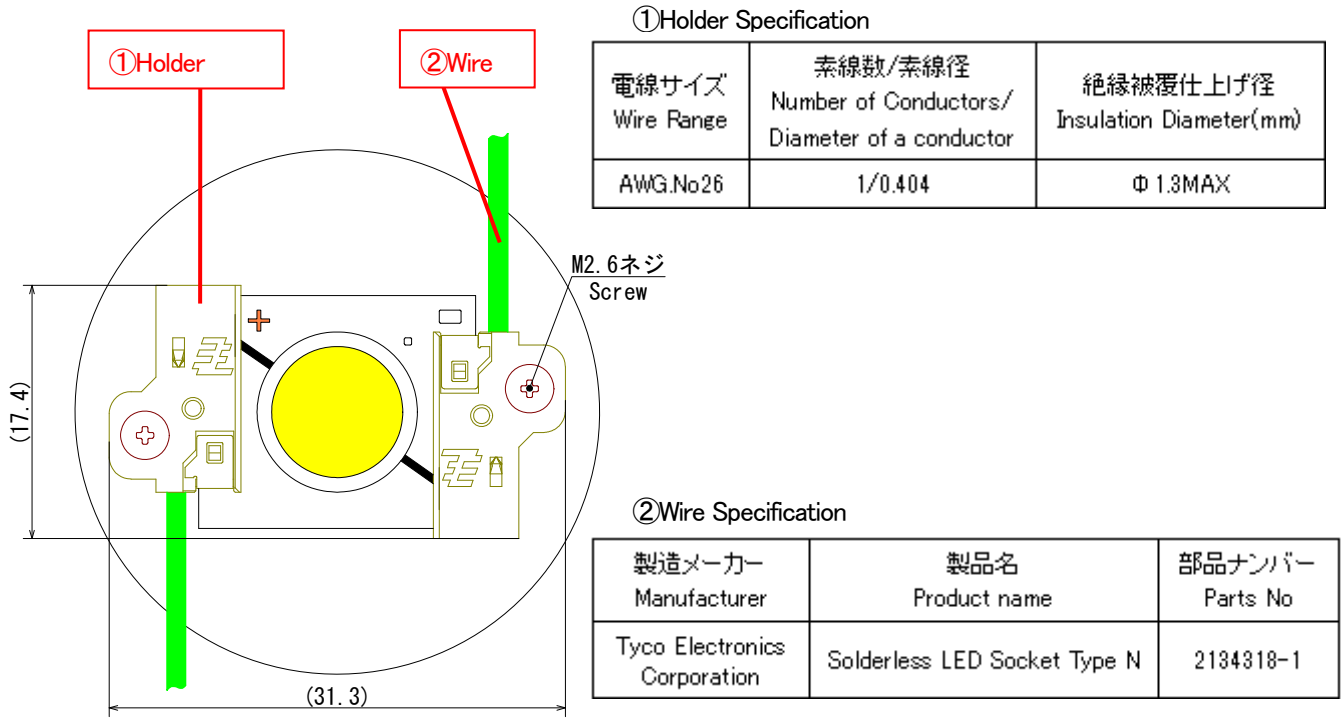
Specification drawing of the COB holder (Solderless LED Socket Type N)
